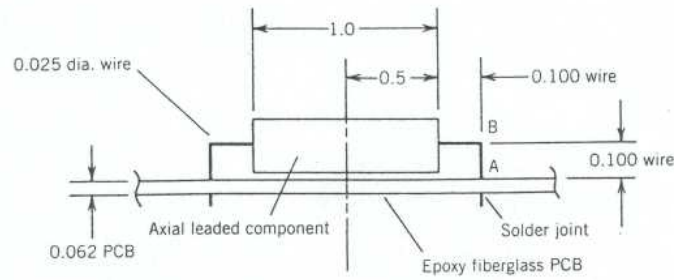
Dimensions of an axial leaded resistor through-hole mounted in a PCB
